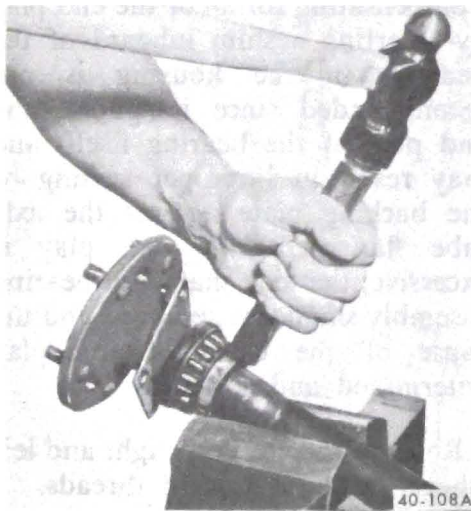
Removing Axle Shaft Bearing Retainer
